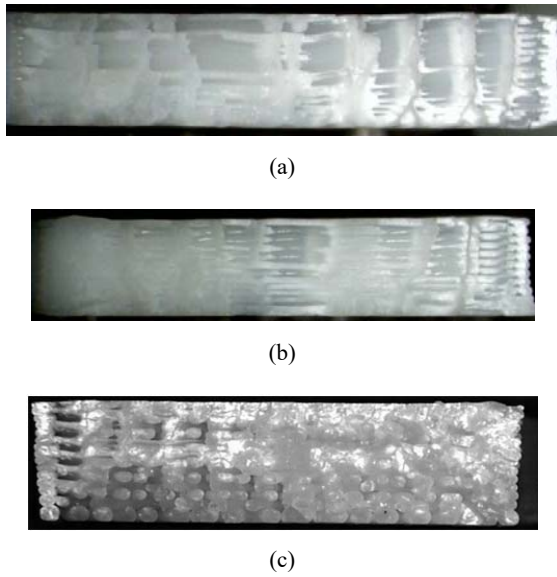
Fractured surface of specimen at (a) 30°, (b) 60° and (c) 30°/60° raster angle
